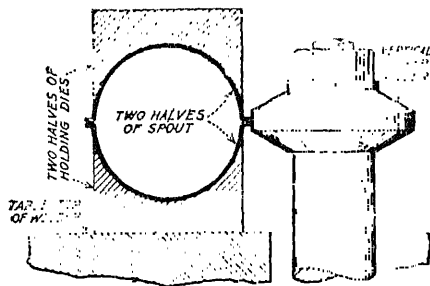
Diagram of Flange Seam Welding Operation.
